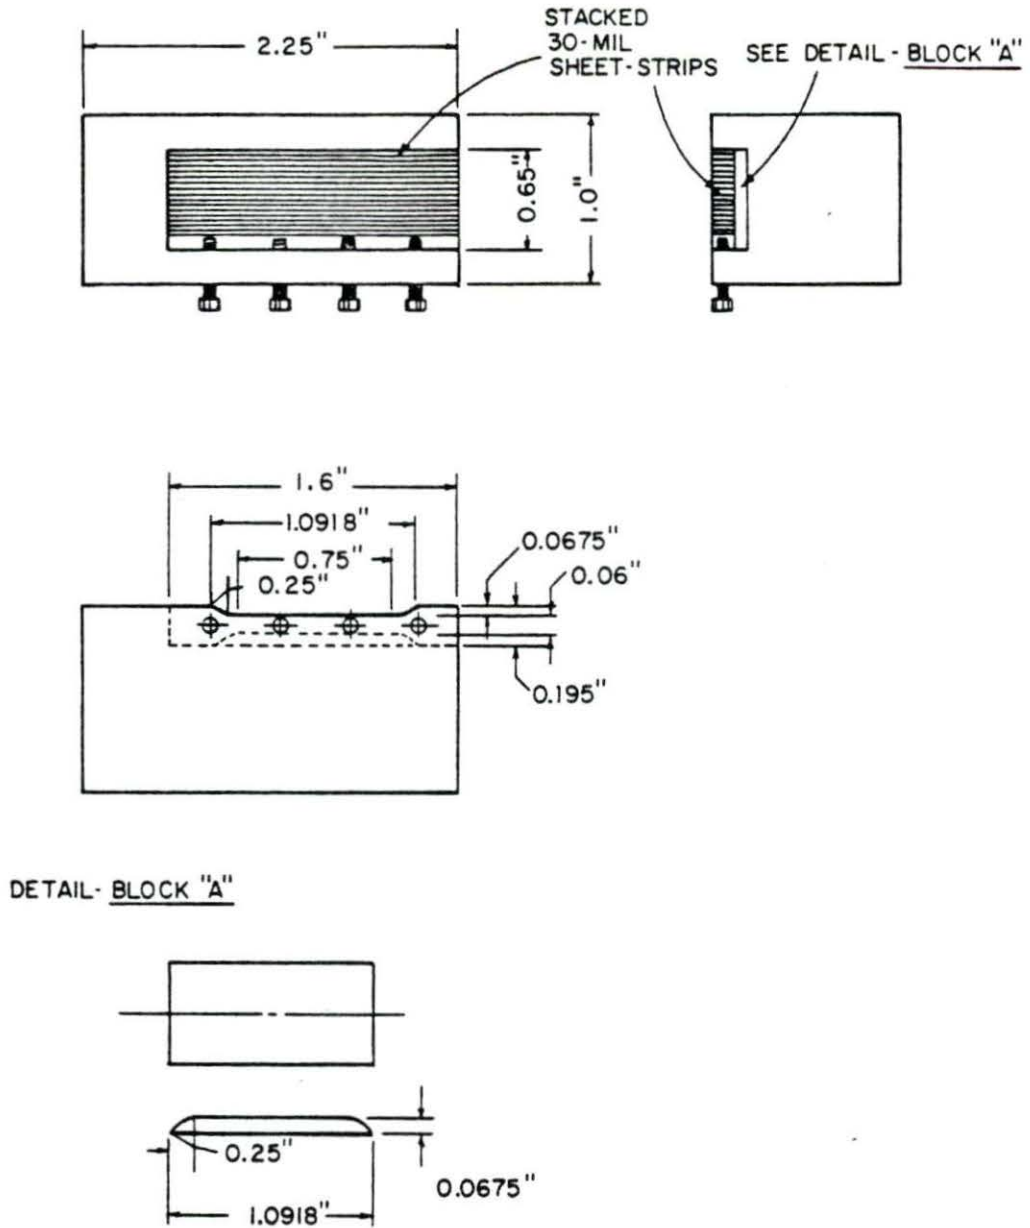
Schematic diagram of the tensile specimen grinding fixture.
